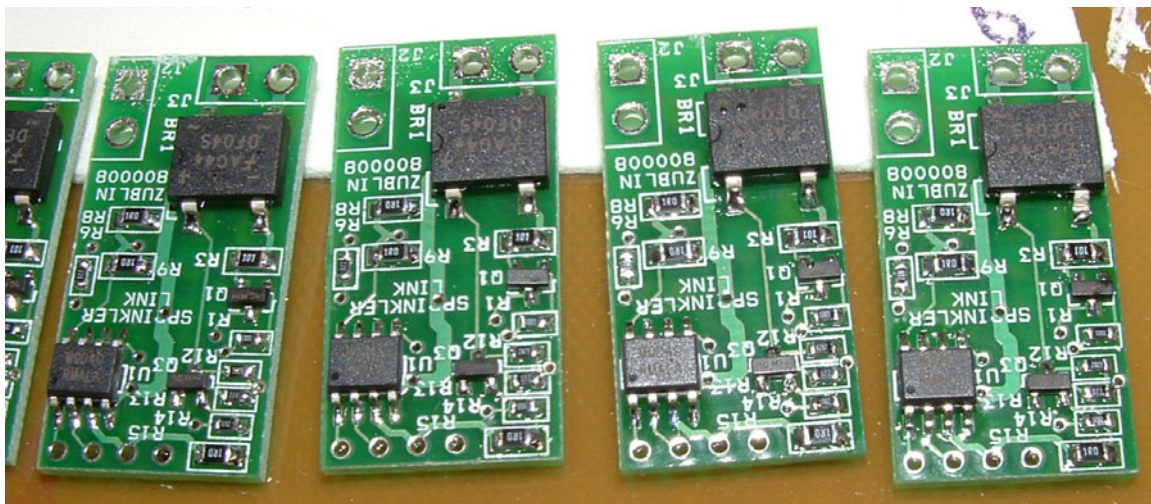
SprinklerLink Slave Prototype PCB - Bottom Side
